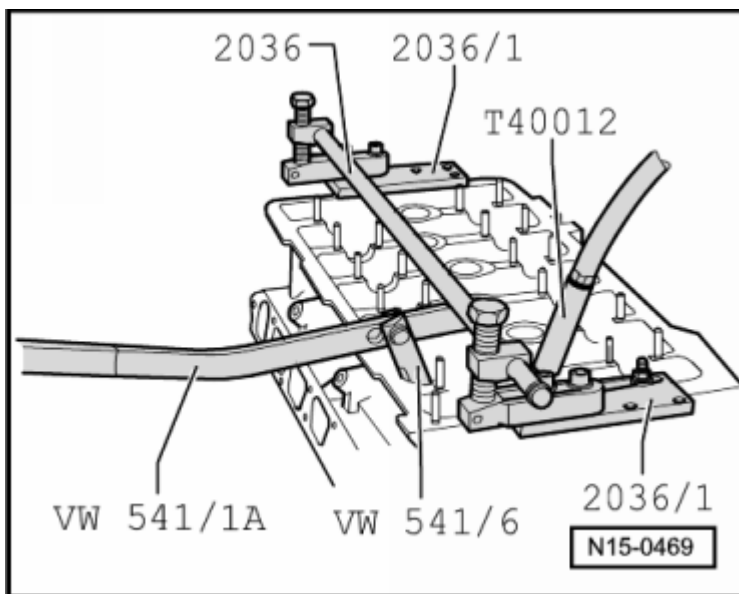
Identifying Adjustable Rod 2036, Adapter T40012 And Valve Lever VW 541/1 A
